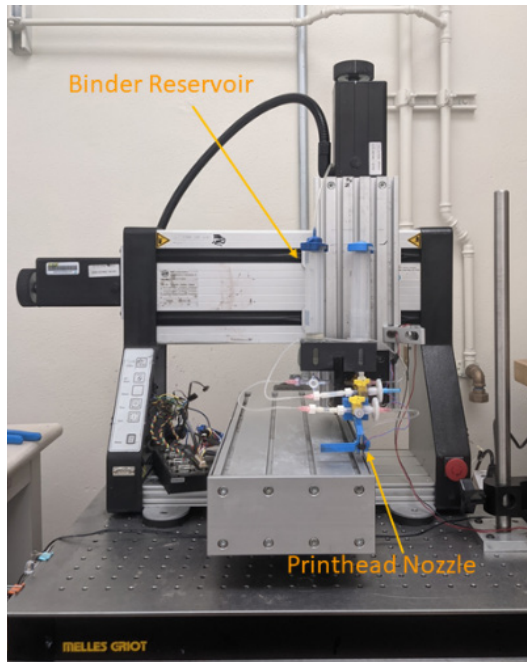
CUSTOM BJ SETUP CONTROLLED USING A LABVIEW VI AND A NI CRIO DEVICE AND CONSISTED OF A SINGLE MICROFAB MJ-AB PRINthead AND A TECHNO DAVINCI CNC ROUTER MODIFIED WITH A GECKO G540 CONTROLLER [3].
